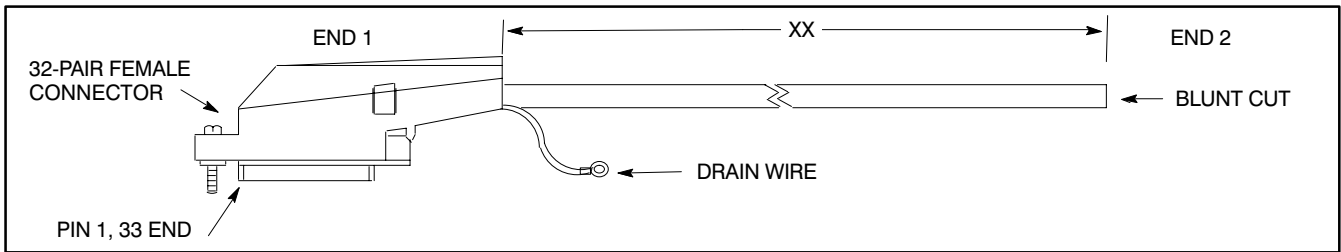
Shelf Connecting Cable Stub Assembly — 003-2972XX
